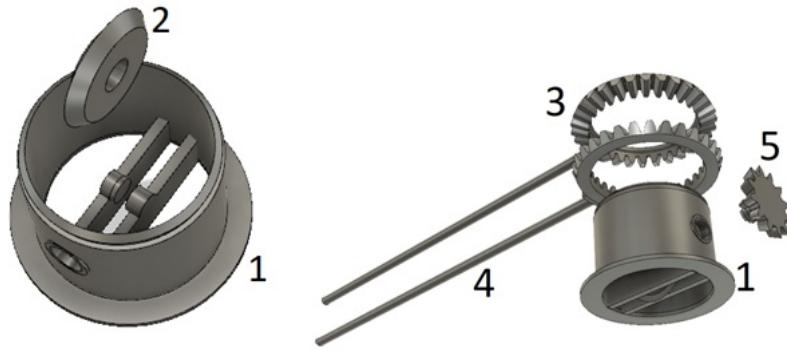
Components of the machine with gears. On the left we can note the wheel (2) that has to be inserted (and constrained to roll) in the central cylinder (1). On the right there is an expanded view of the geared components: the two gears with the rods will stay on the top (3) and on the bottom (4) of the central cylinder (1), and the little gear (5) (fixed on the hole of the central cylinder) will transmit the motion between the top (3) and the bottom (4) gears.
